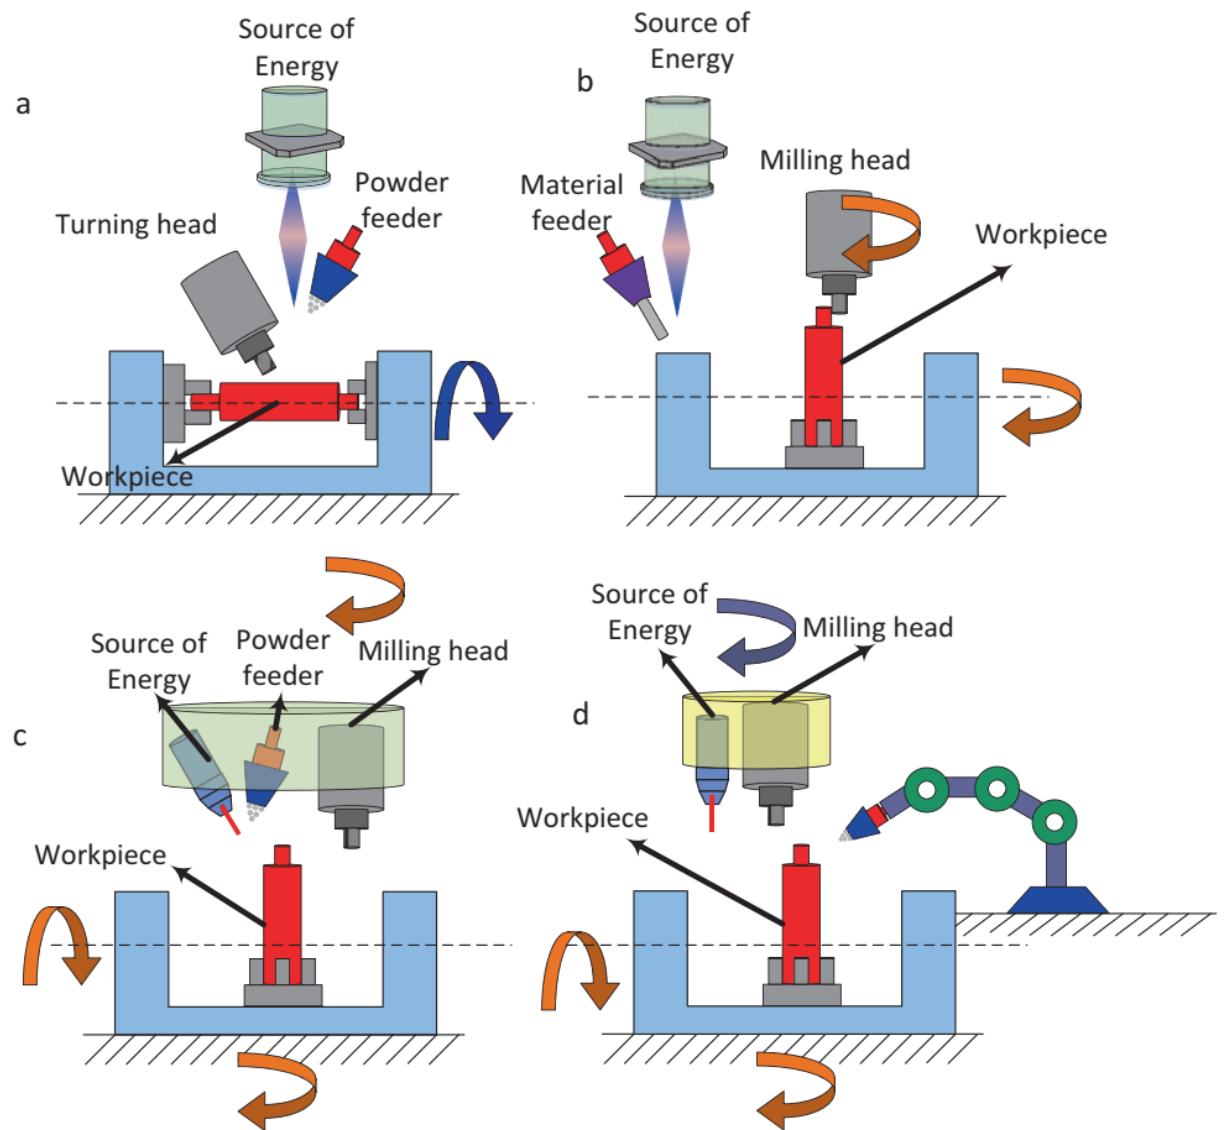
Hybrid DED by machining, (a) turning with PAAM, (b) multi-axis milling with PAAM (c) integrated laser powder head DED with multi-axis milling, and (d) separate laser and powder head DED with multi-axis milling
